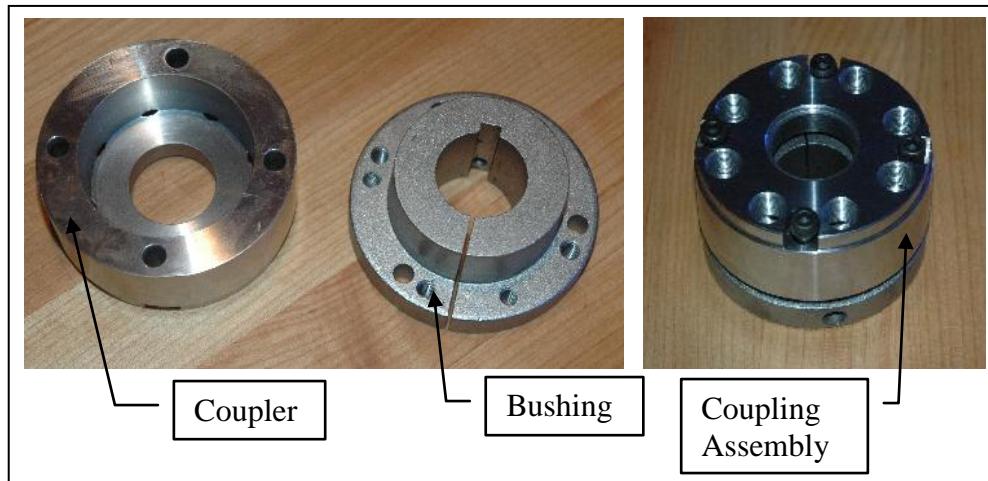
A coupling with 8 set screw coupler and tapered lock bushing
